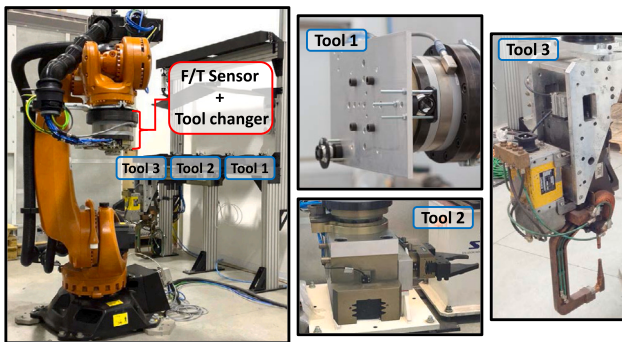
Available tools for IR assessment: plate (tool 1), industrial gripper (tool 2) and spot welding gun (tool 3).
